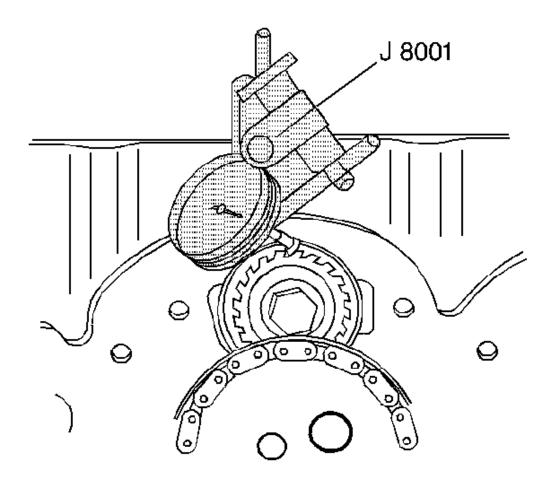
Measuring Balance Shaft Gear Lash Courtesy of GENERAL MOTORS CORP.
